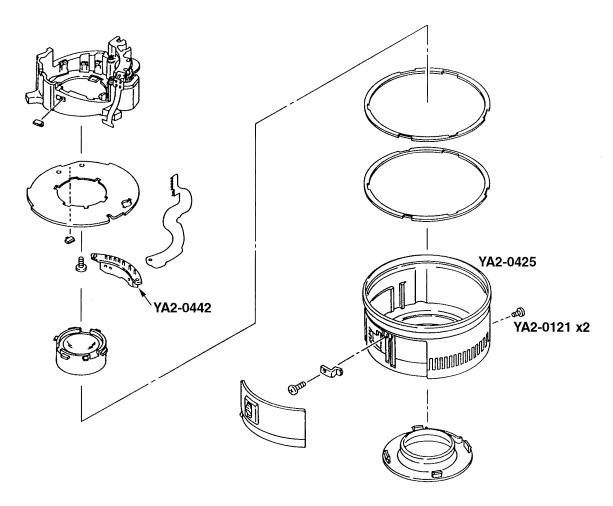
Removing Parts from EOS KISS/REBEL X/500
